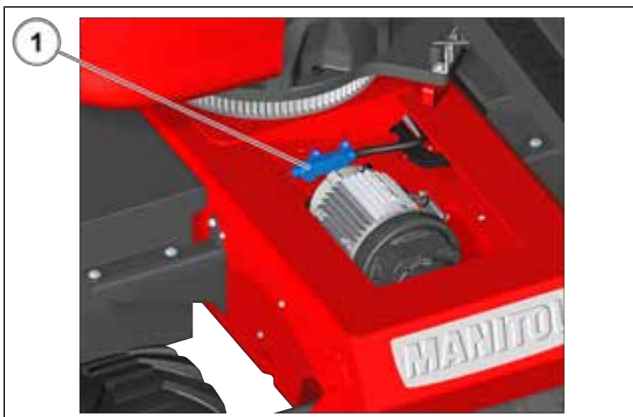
Put the high-voltage circuit fuse back in place - from machine no. MAN00000J01101634
